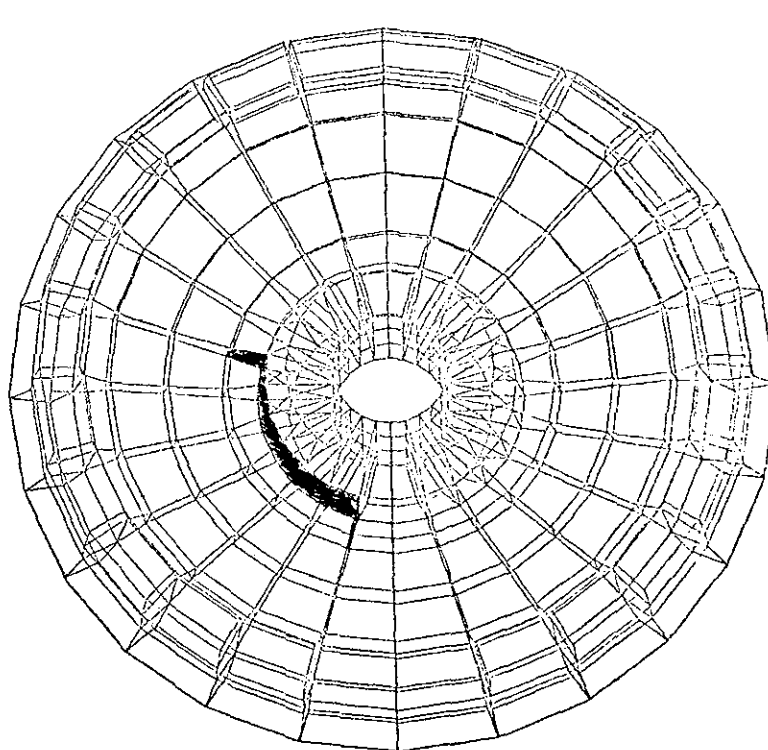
VIEW OF A 33 INCH WHEEL WITH ONE LARGE PLATE CRACK - ANSYS GEOMETRY
